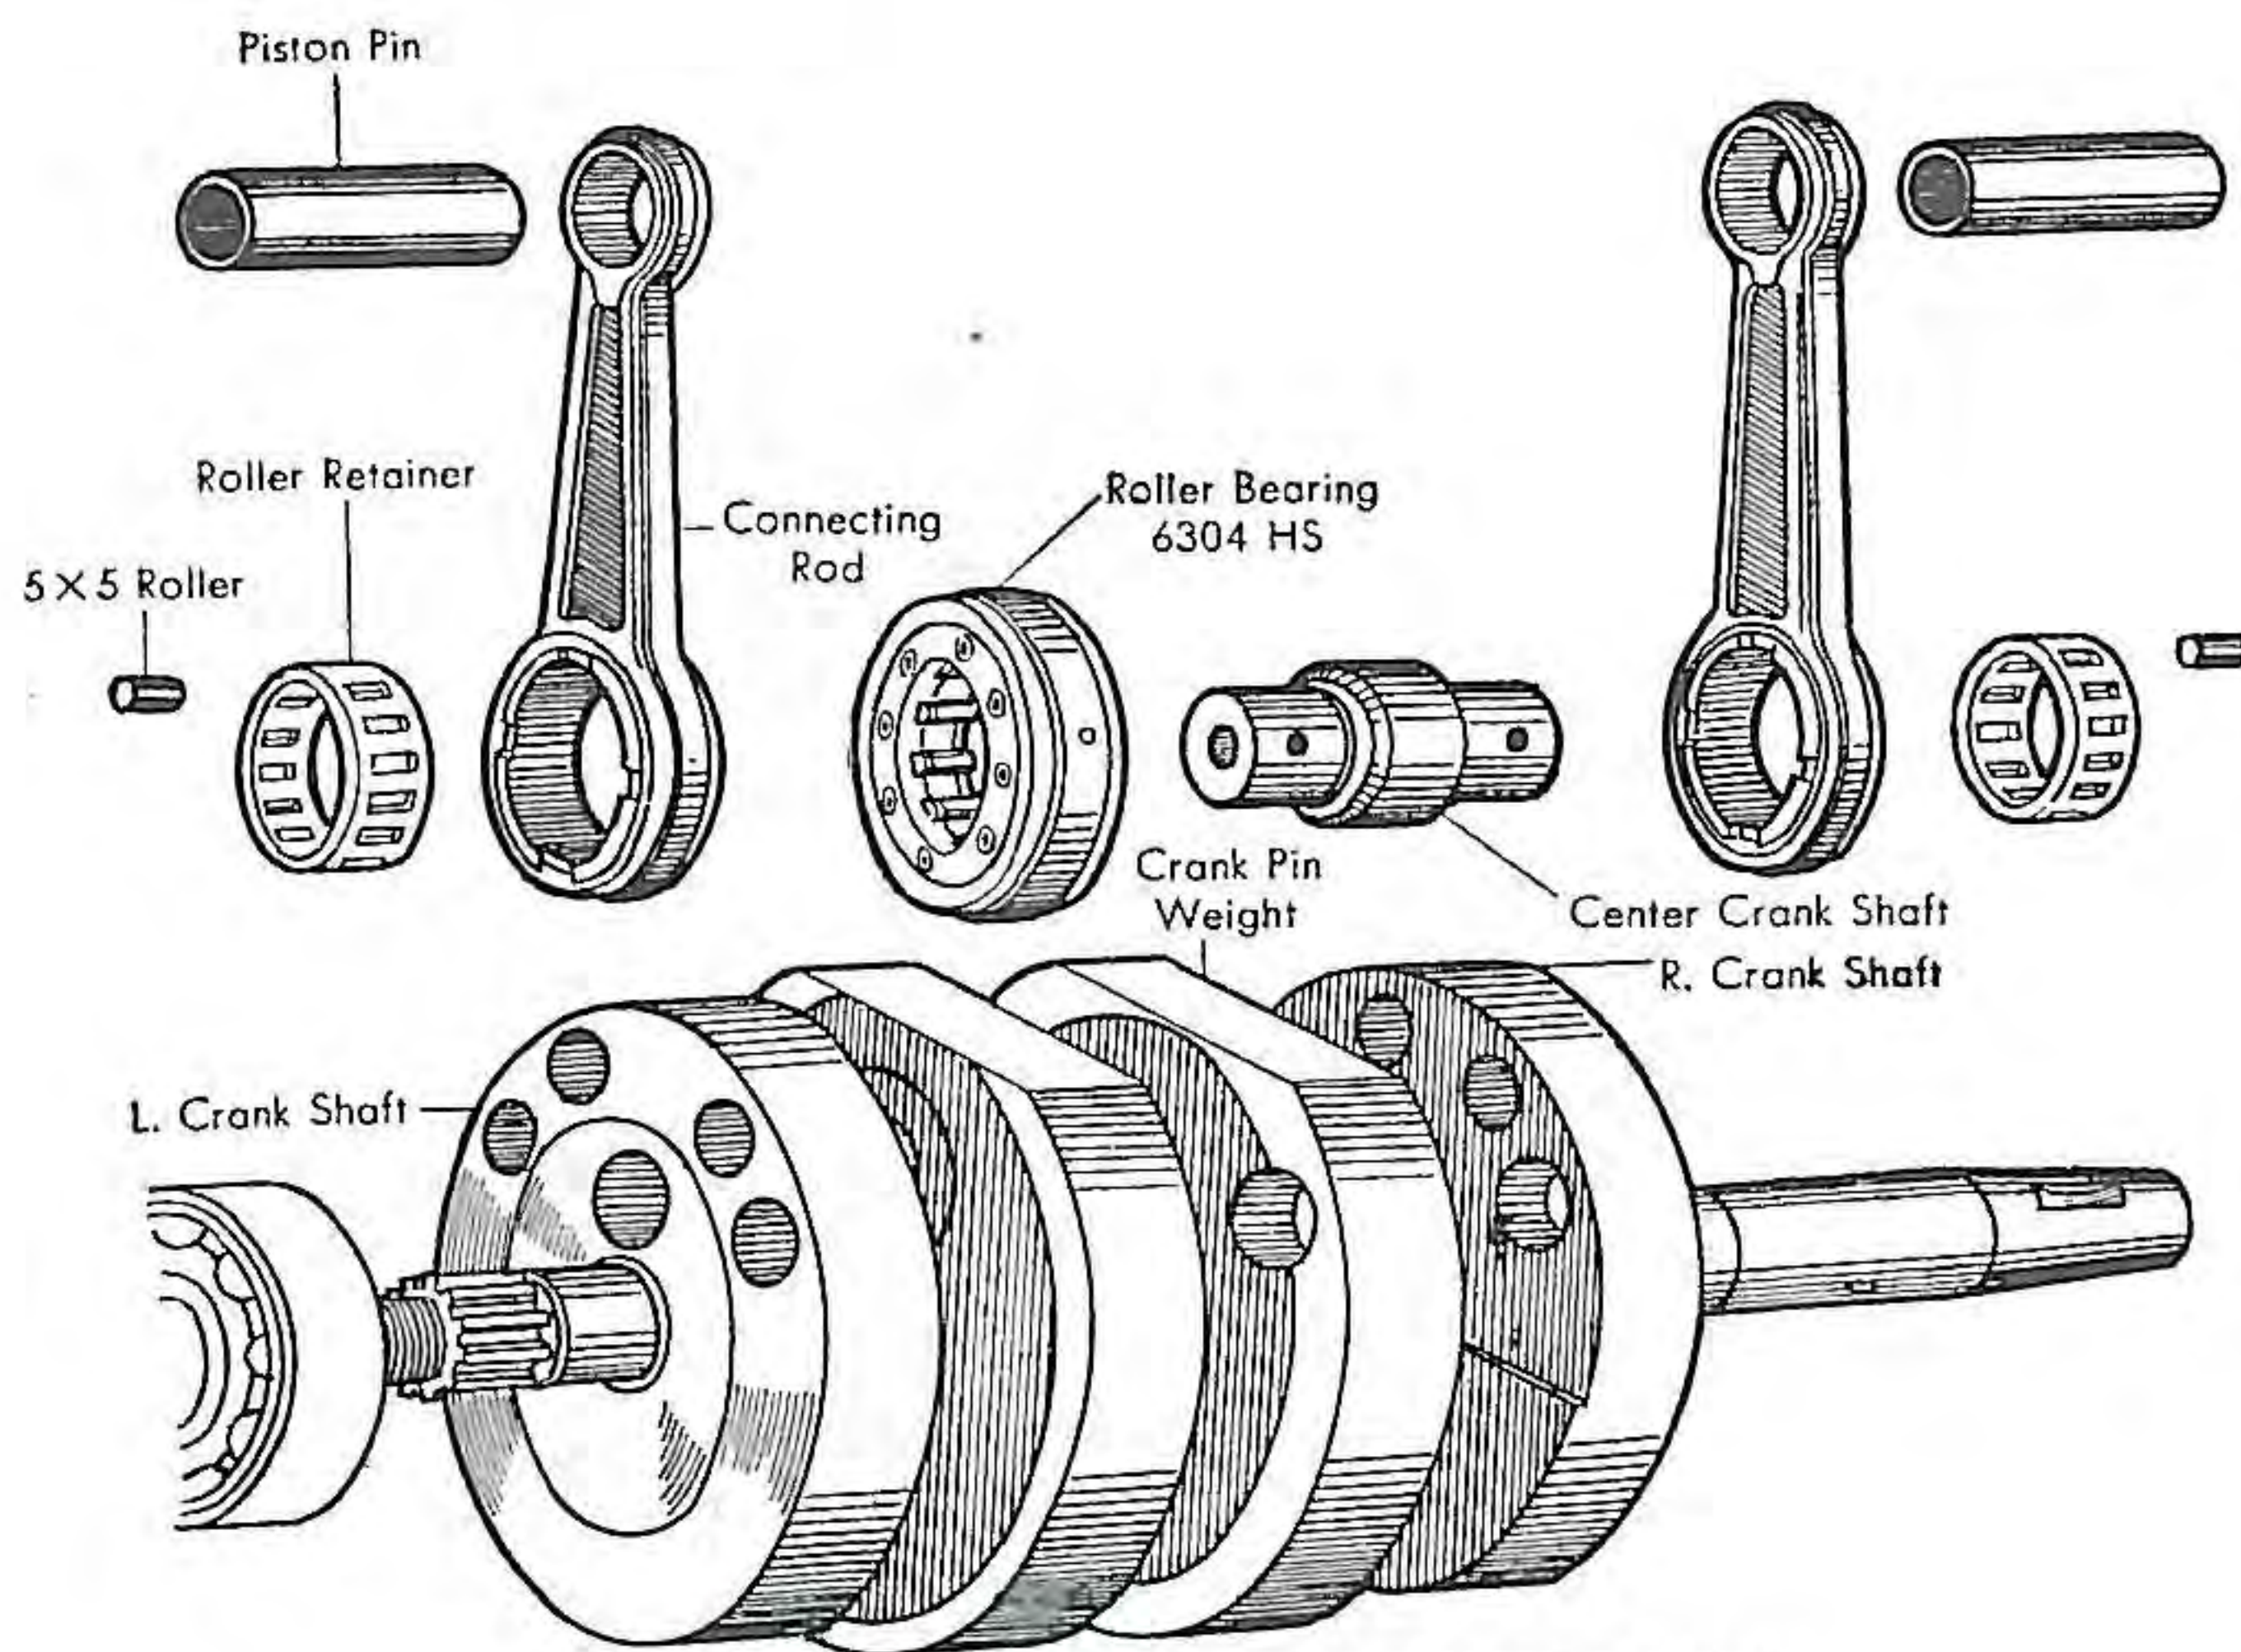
Exploded view of crank shaft (CB92 & CA95)
